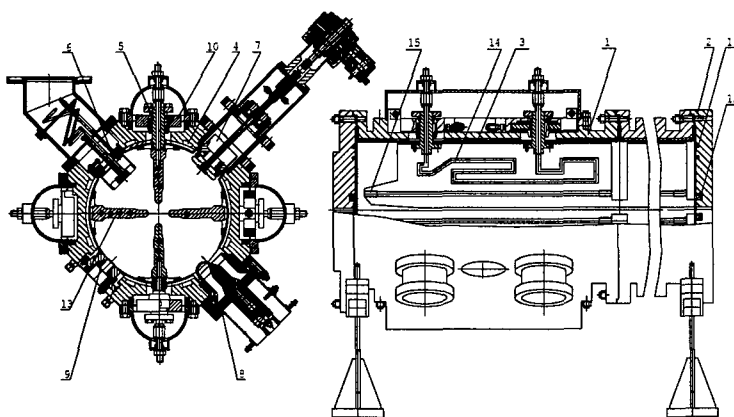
Simplified assembly drawing of the RFQ cavity: 1- tank body; 2- cover; 3- inner lining; 4,11,14 - cooling channel; 5- bellow unit; 6,7- tuning units; 8- rf power loop; 9- peak-up loop port; 10- adjustment plate; 12- beam current transformer; 13- vane; 15- target hub.
